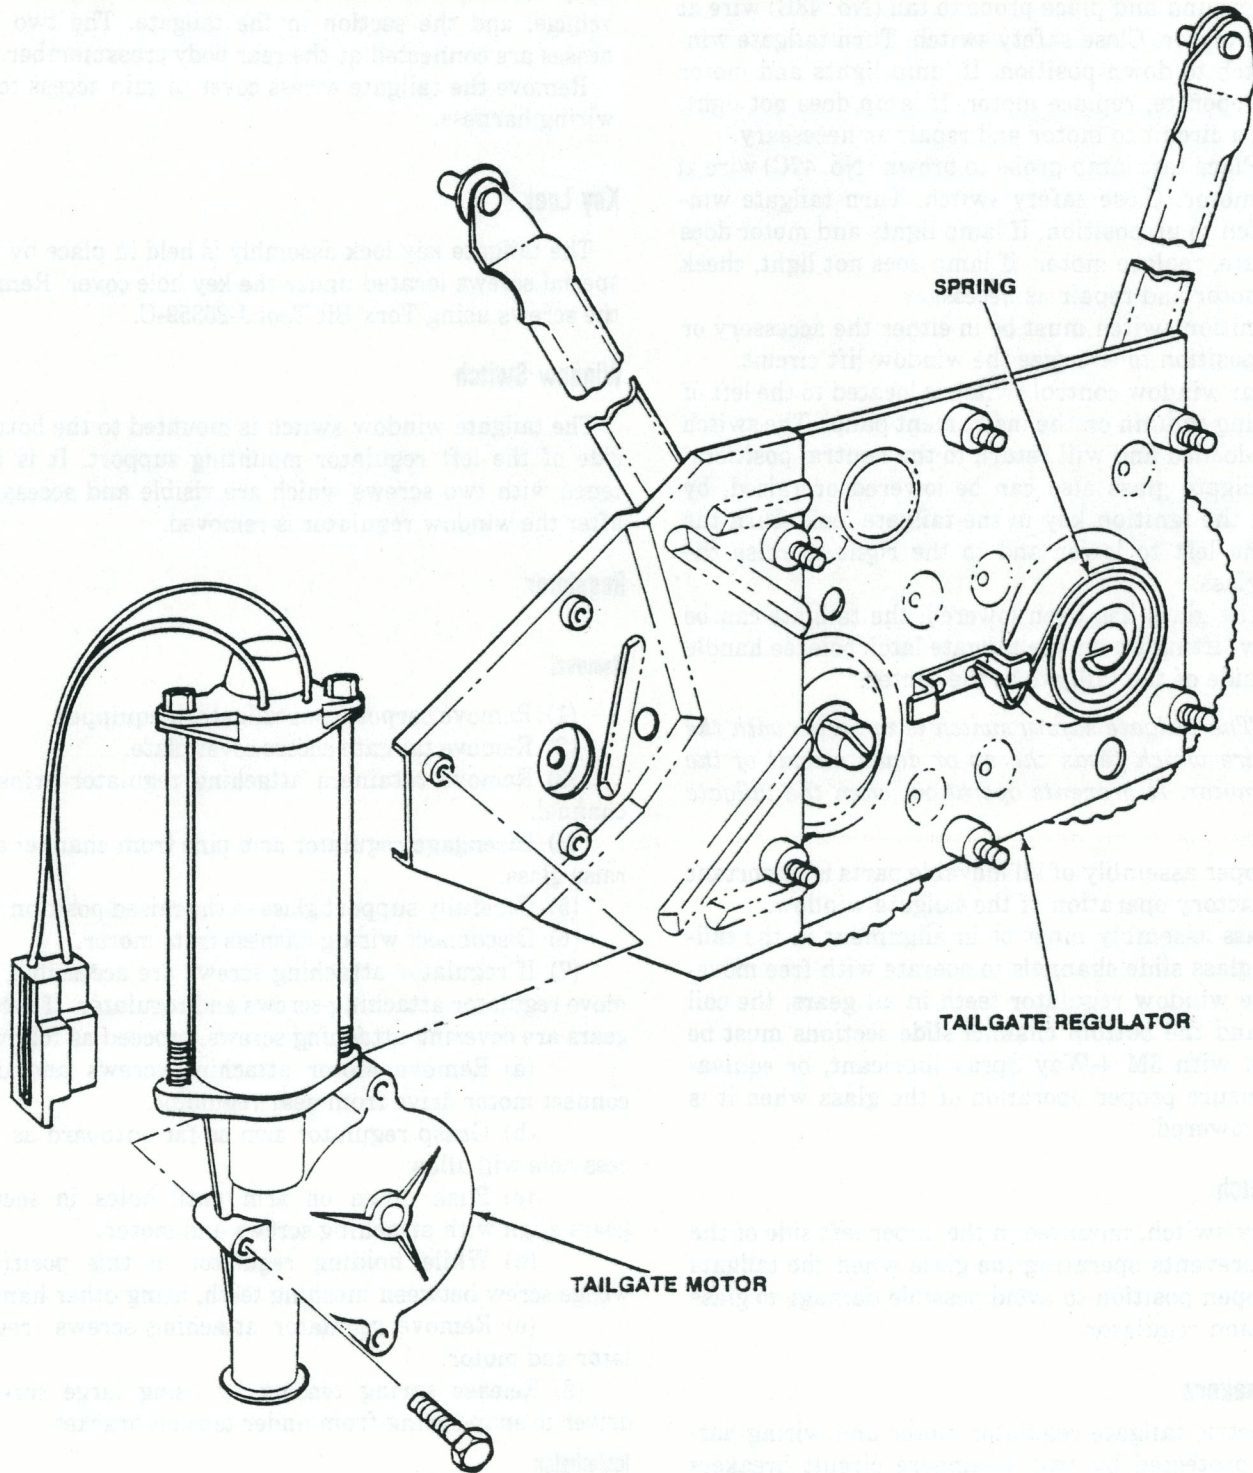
H-5 Power Tailgate Window Regulator and Motor
